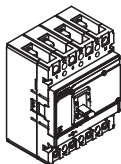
NXMS-1250/1600 connecting plate installation diagram
